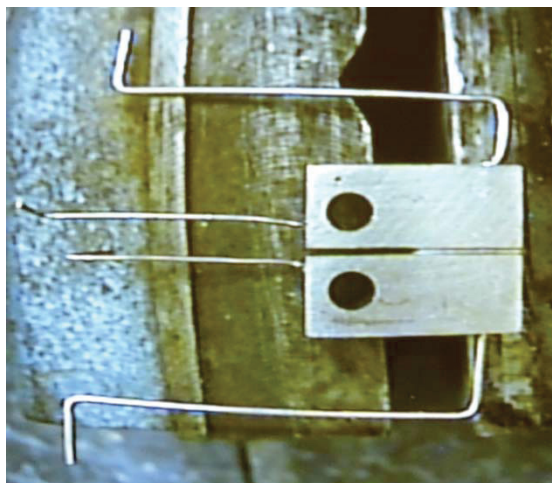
CT1 specimen after short current and potential lead welding is completed. Dimensions of the photograph may appear distorted because the photograph was taken from video monitor specimens.
